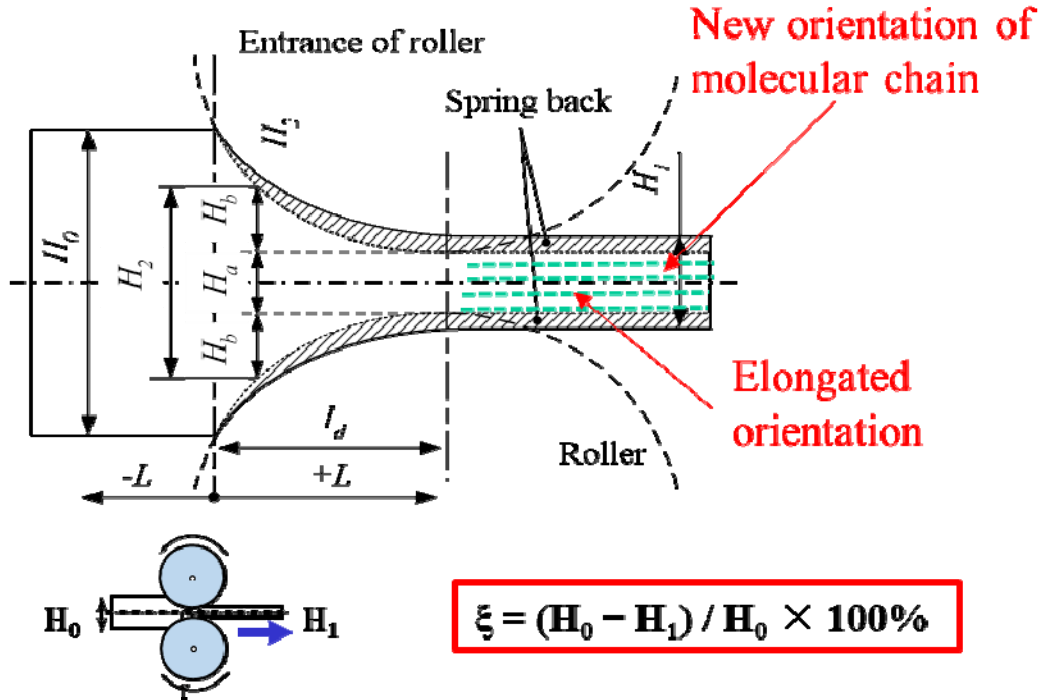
Schematic drawing showing spring back and the definitions.
